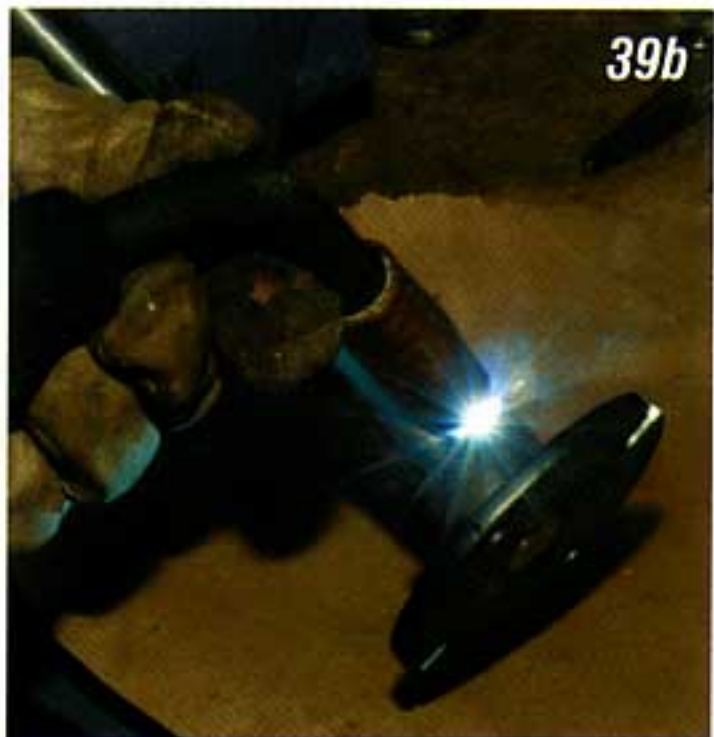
& 39b: Slip the top half of the coupler onto the steering shaft and align with the scribed mark. Weld the coupler to the shaft.
